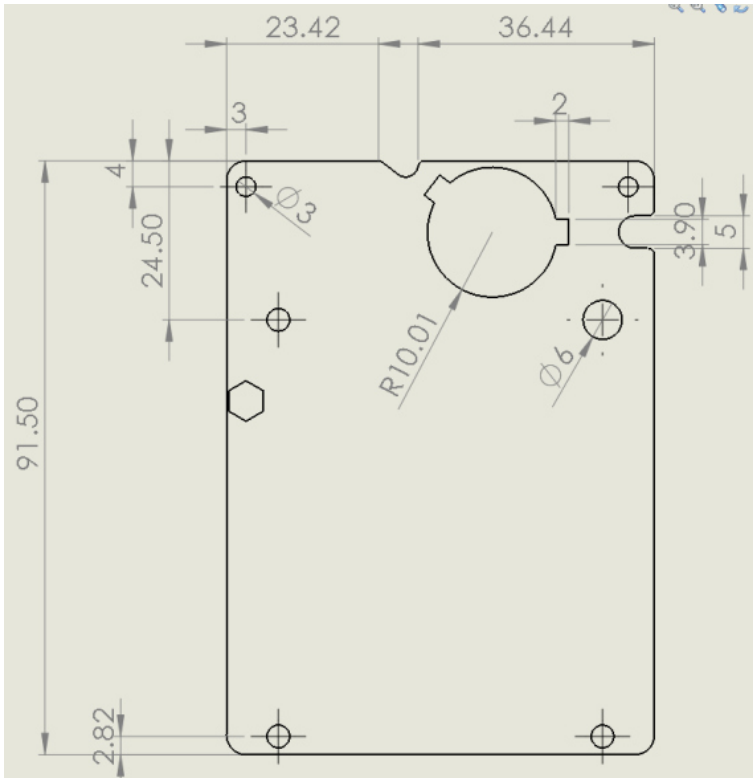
'Driver to optics mount 4mm v3.1'. To mount the laser and laser driver to the toolhead platform
